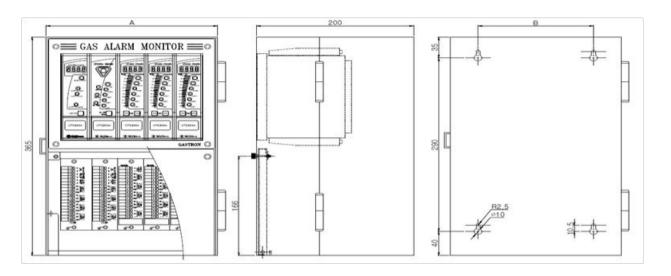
Outline drawing of Panel Mount (Power Unit not applied)]
